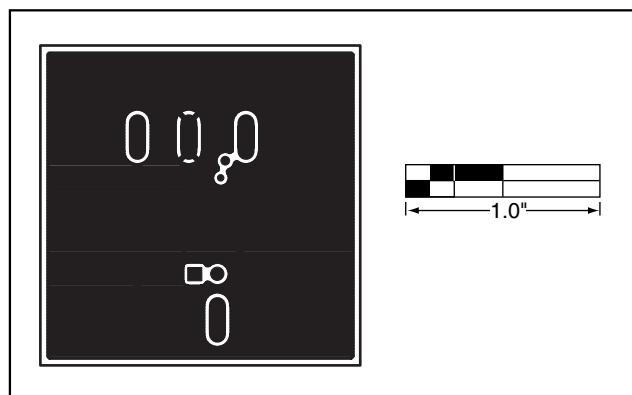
MAX2754 EV Kit PC Board Layout—Ground Plane 2
